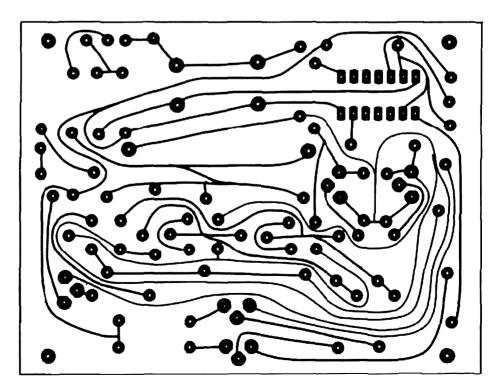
Connect the circuit pads with narrow black drafting tape. This is your completed printed-circuit layout transparency.
